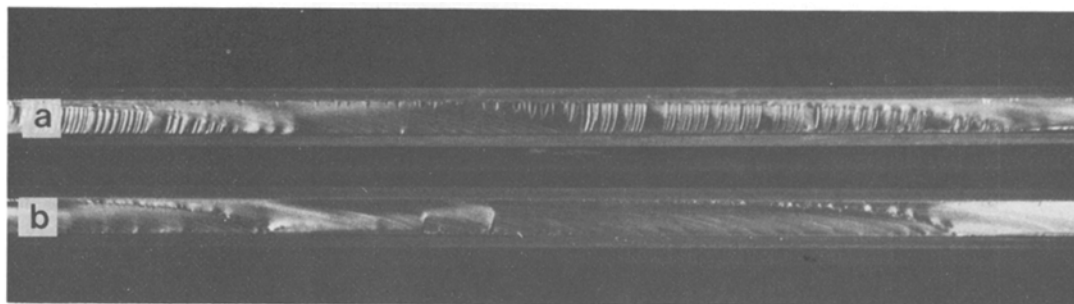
Fracture surfaces of immersed samples. Cross-head speed 20 mm min⁻¹. (a) Sample coated with grease. (b) Sample free of grease.
